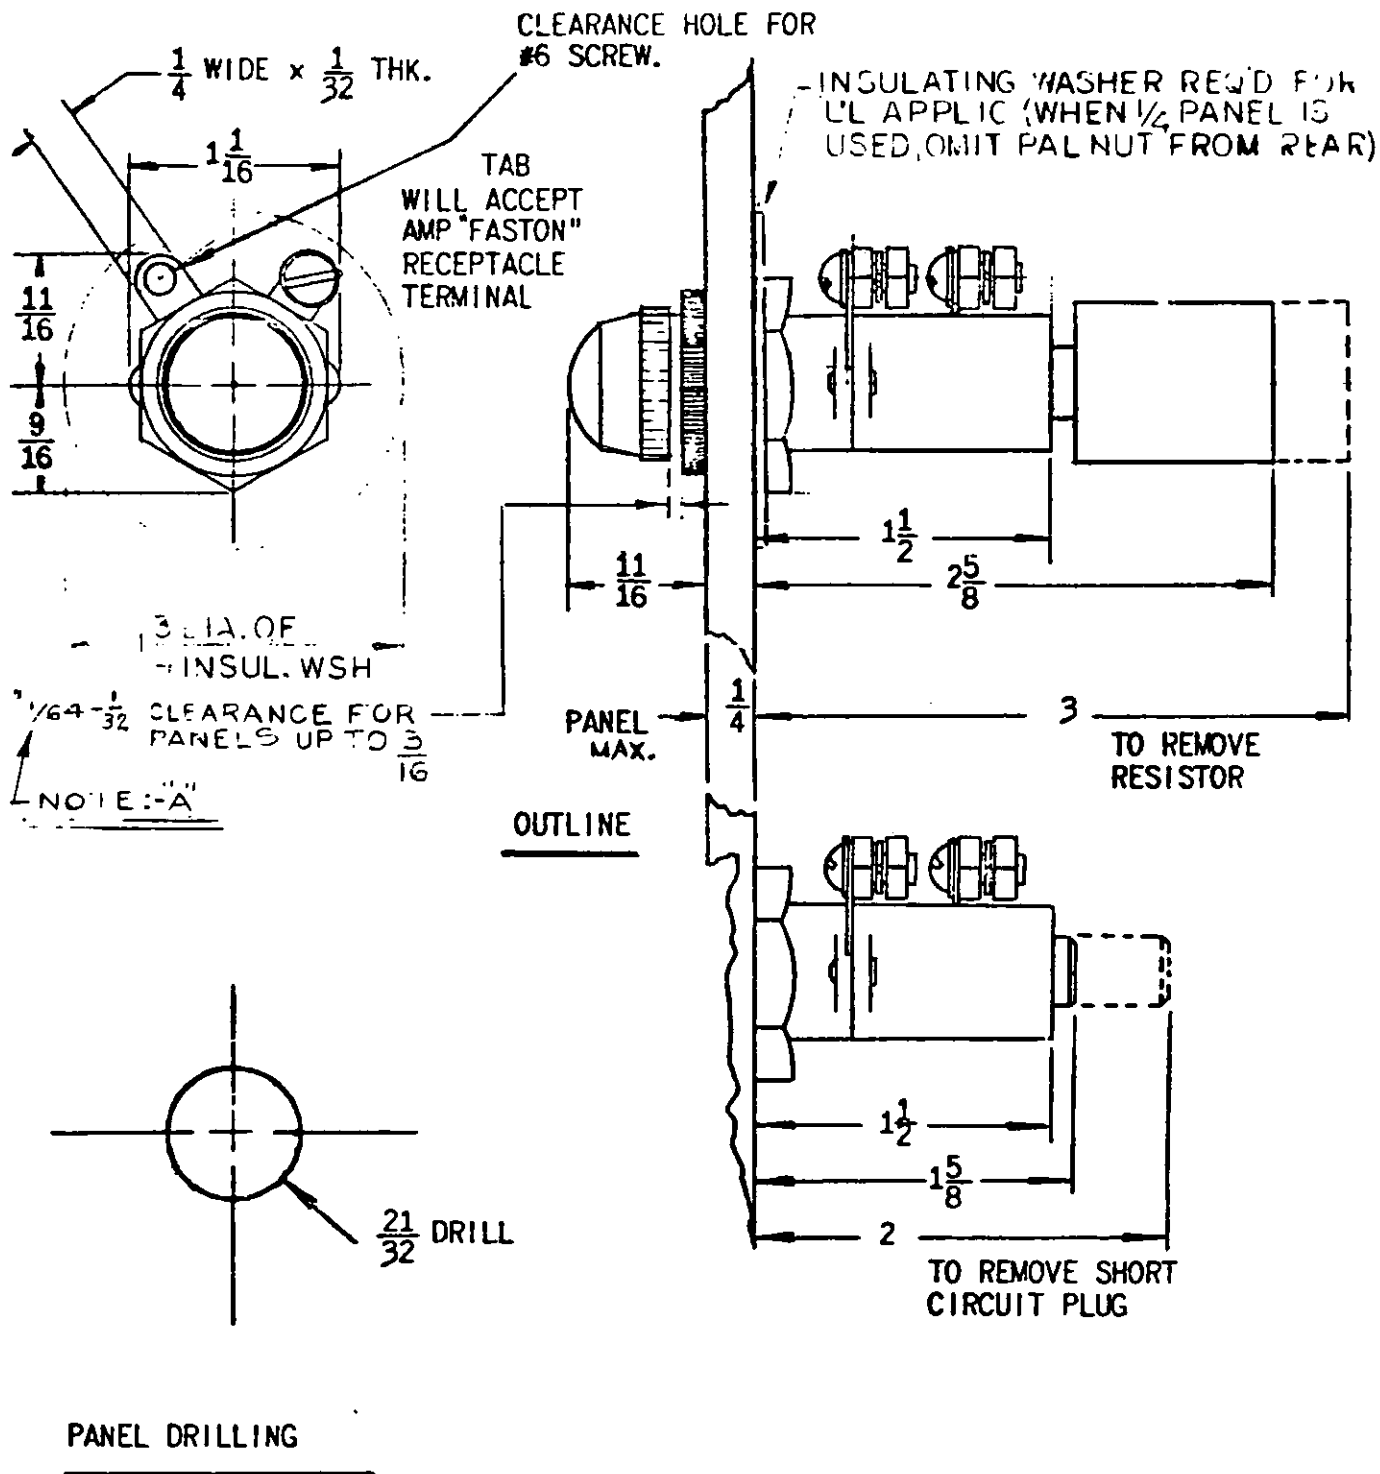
(0165A7859-6) Outline And Panel Drilling For Type ET-16 Indicating Lamp
